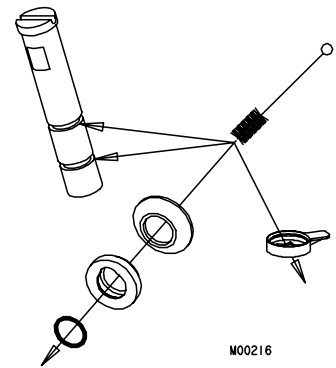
Clean O-ring grooves, seal and nozzle with brush.
